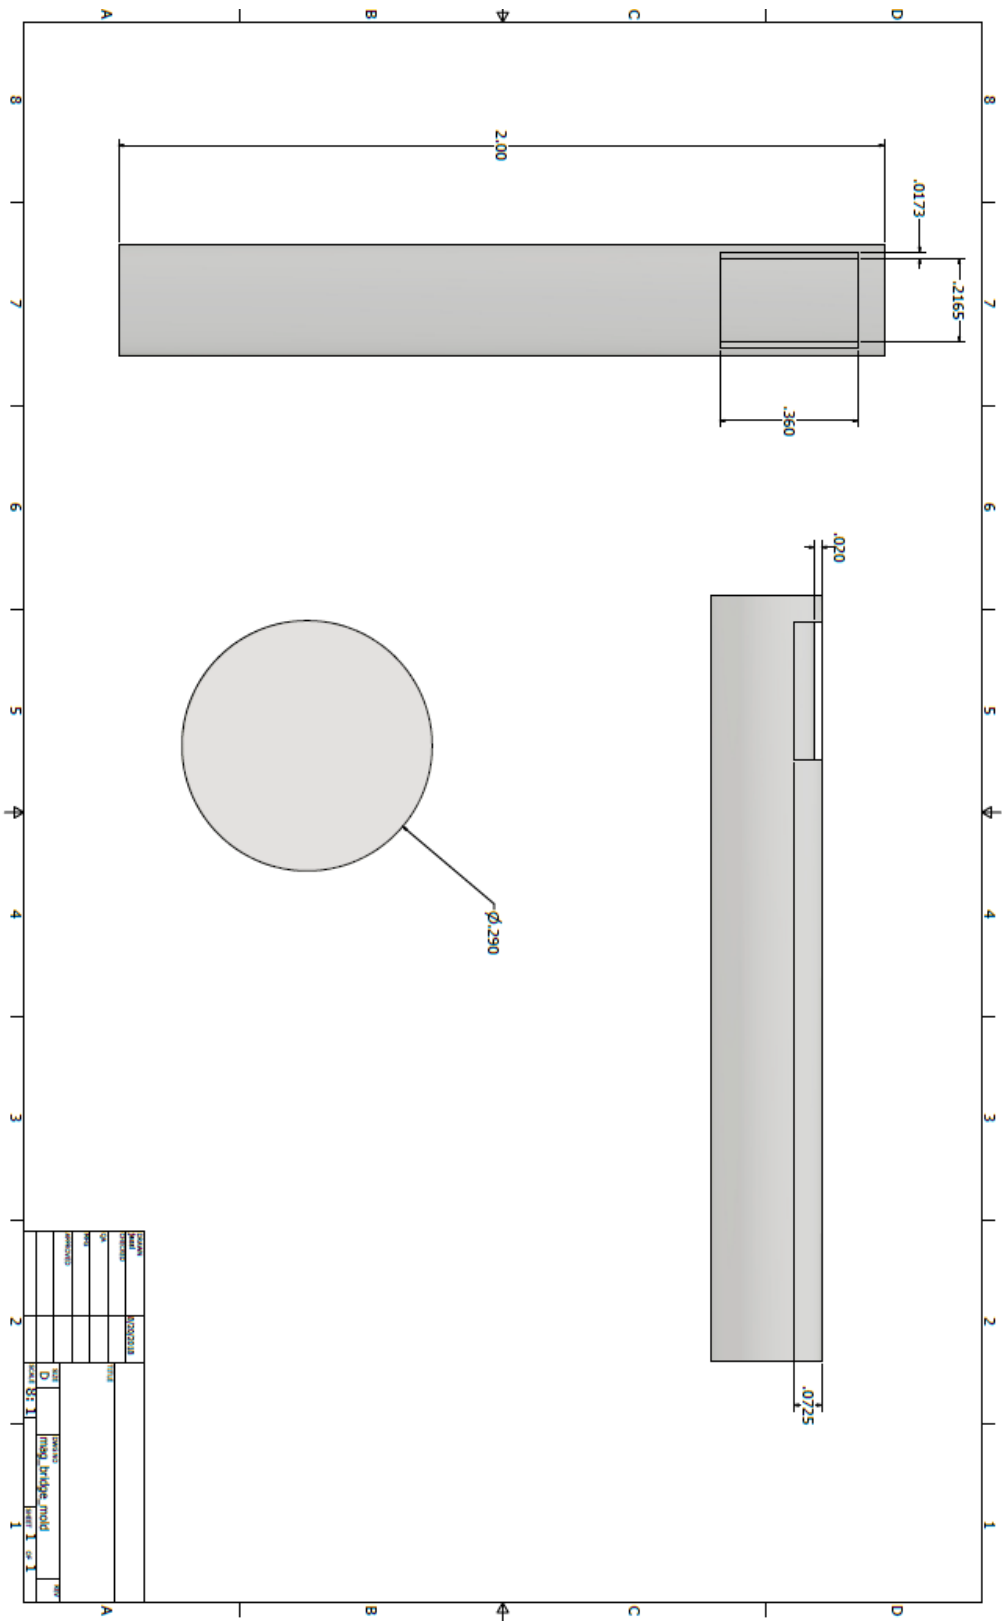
Modified-Aldermann Grant coil capacitive bridge soldering tool.
